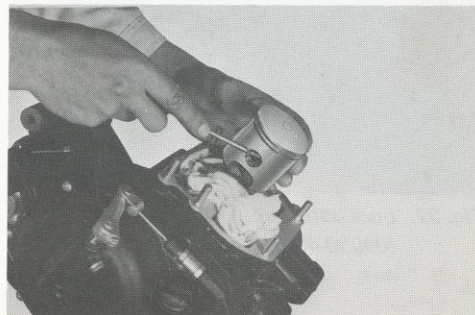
Remove piston pin circlips from the piston. Use a piece of cloth as shown, in order to avoid dropping the circlips into the crankcase.
